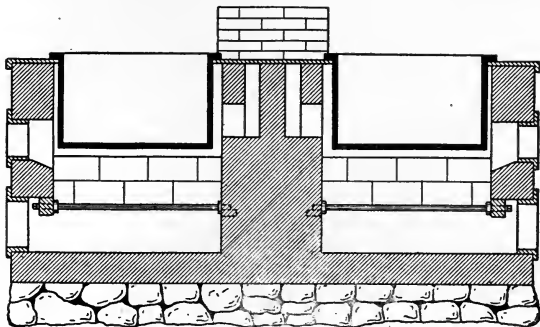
SIDE ELEVATION OF TINNING FURNACE
